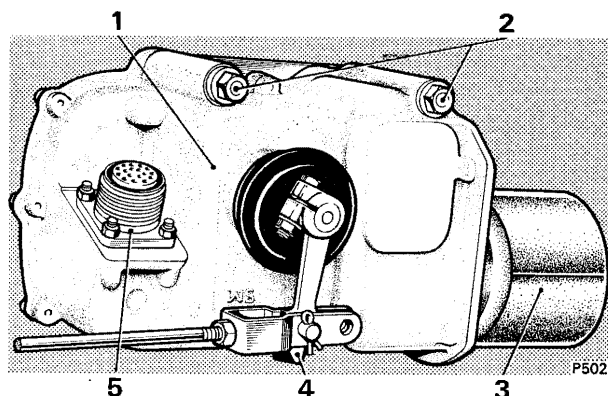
ELECTRIC GEARCHANGE ACTUATOR
